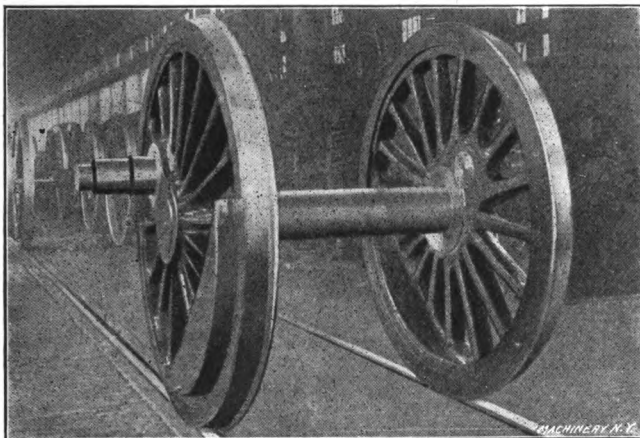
Completed Driving Axle and Drivers for Heavy Pennsylvania K-2 Type Pacific Passenger Locomotive
